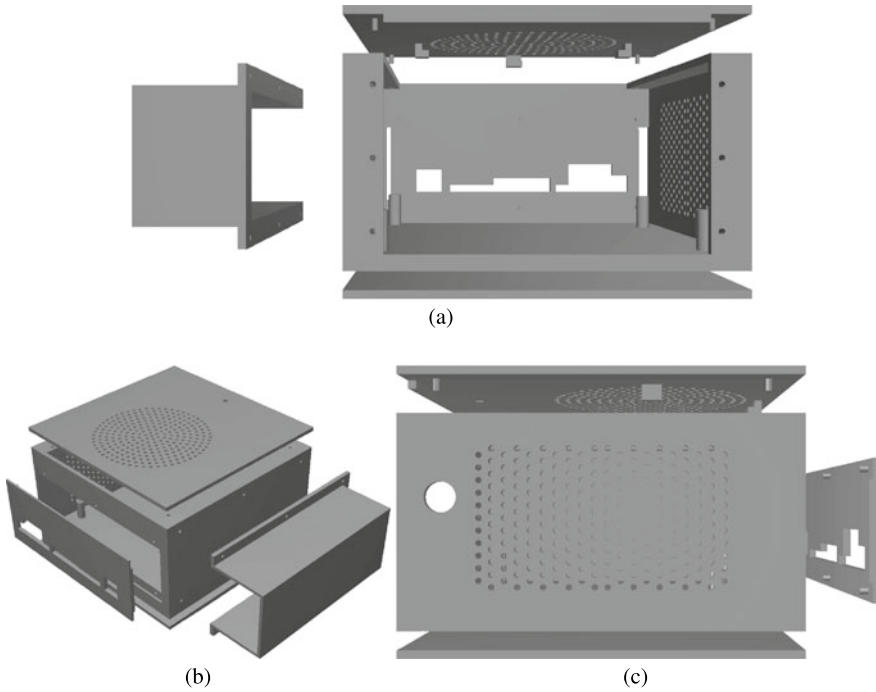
3D model of the printed case. a Front view, b top back-side view and c side view of the case
